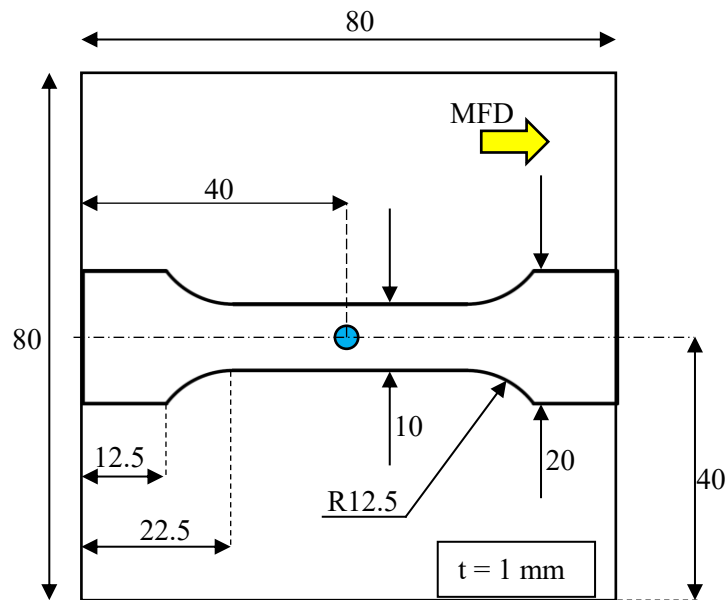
Geometry P/A (DEM10_2). Specimen and plate dimensions.
